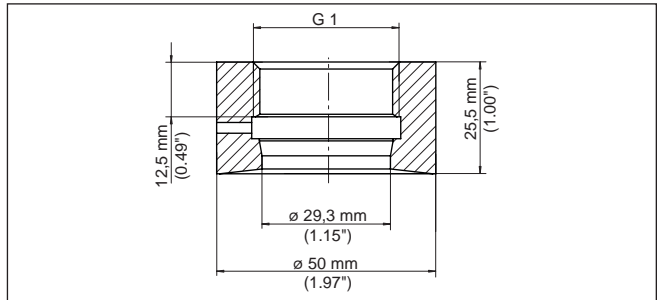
Dimensions direct welded socket G1 - O-ring seal
